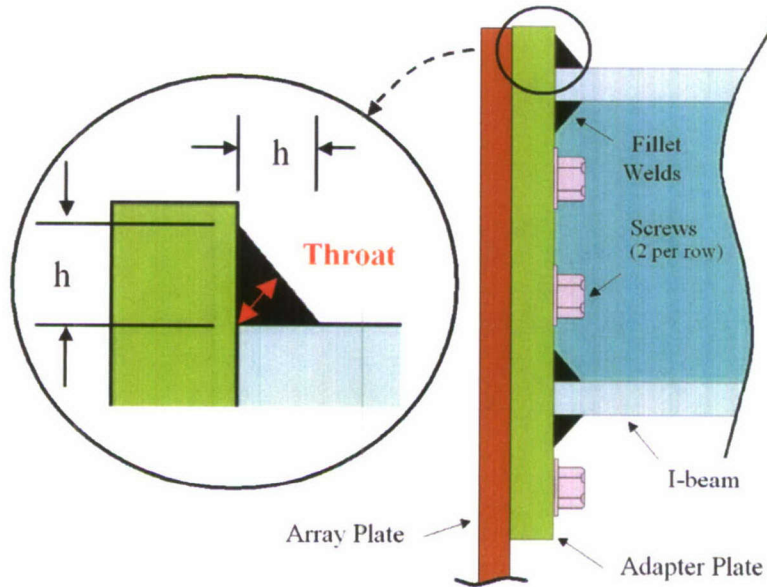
Definition of Weld Throat for the Fillet-Welded I-Beam-To-Adapter-Plate Connection (Arrays and standoff pipes not shown.)
